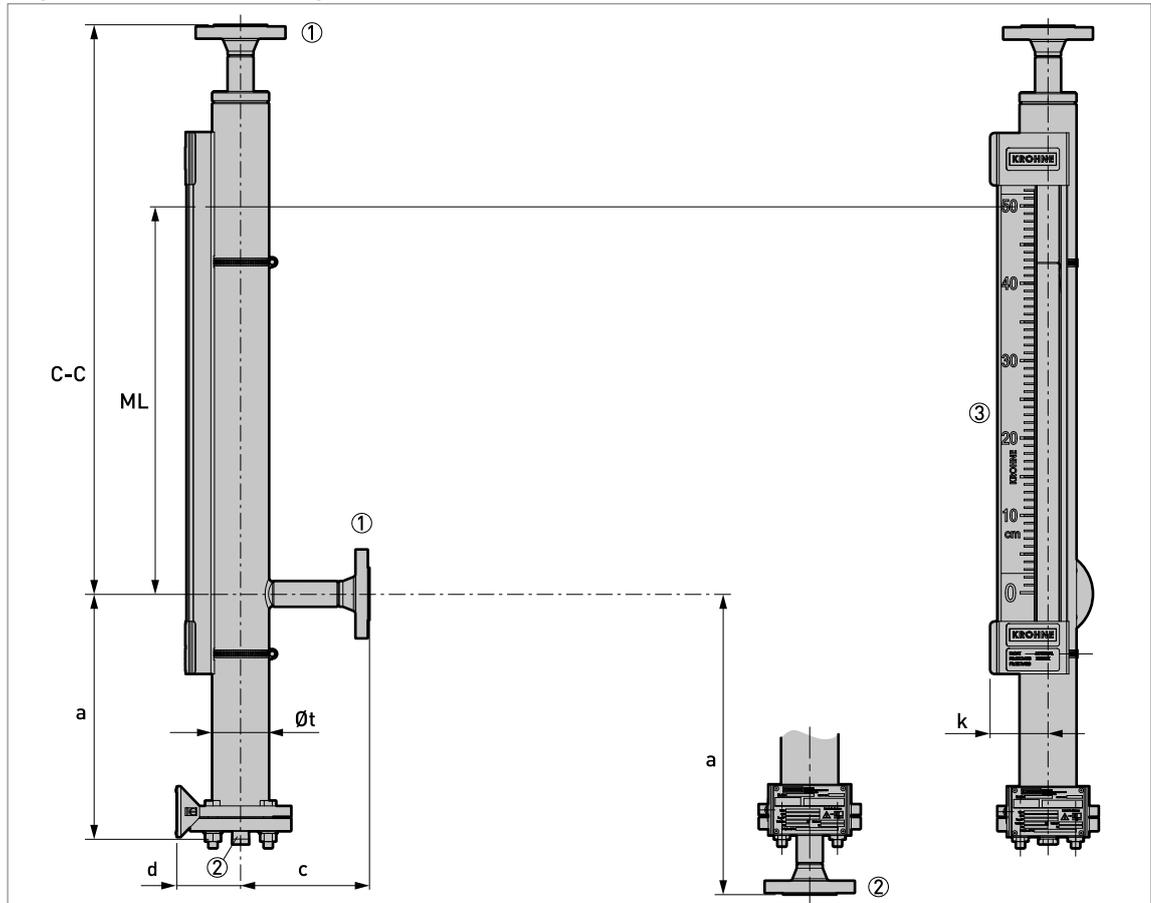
BM26A-6000: top axial - bottom side process connections
